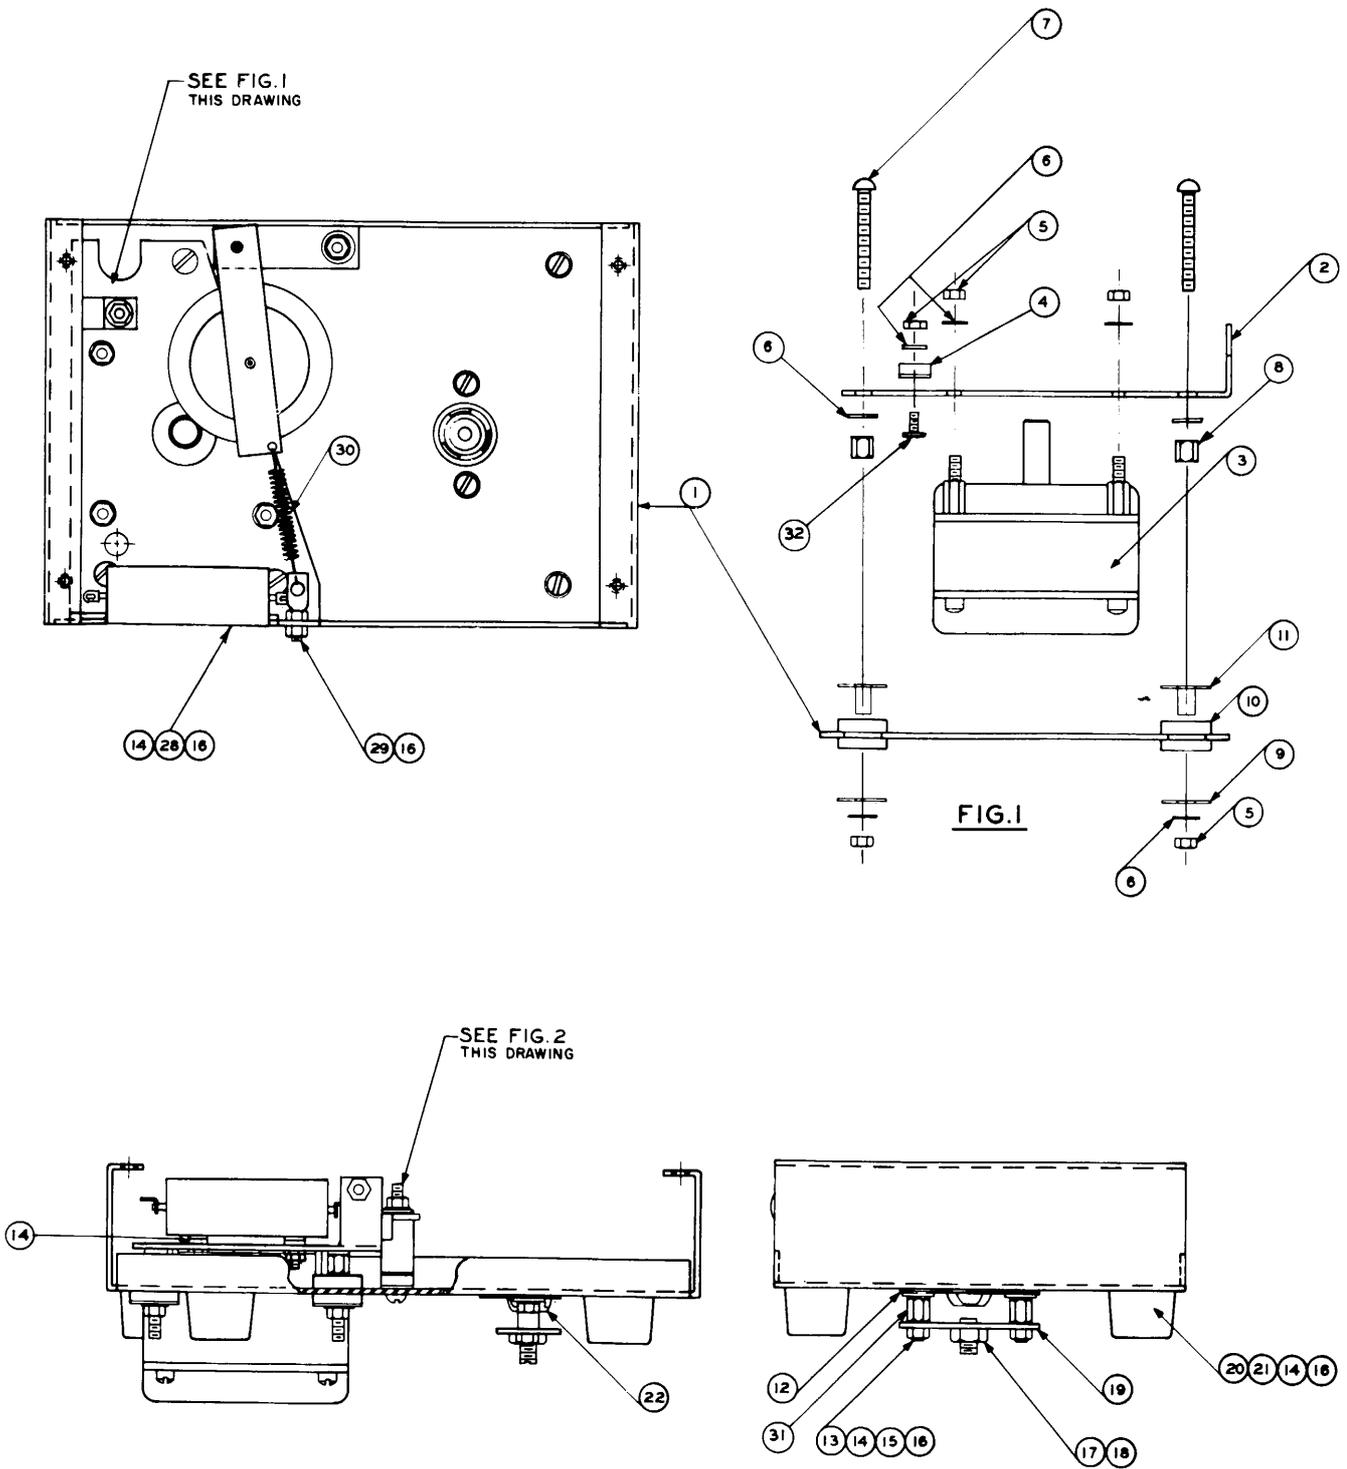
Motorframe assembly, WW-5797-1 (part of motorboard wiring assembly, figure 5).
